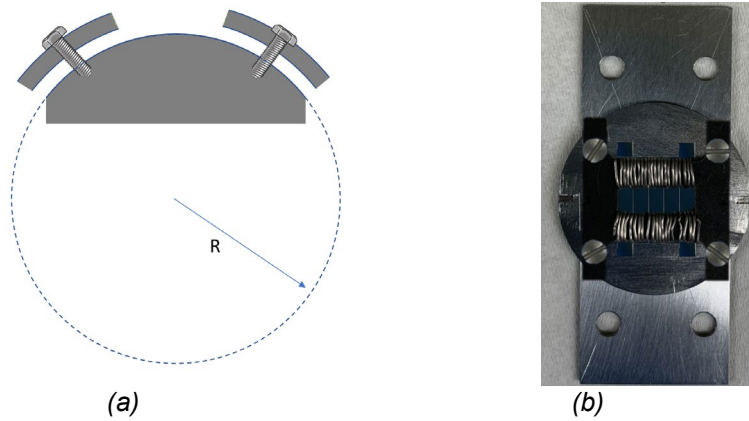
(a) Schematic for specimen fixture with curved surfaces (b) Actual picture of specimen fixture with samples.
